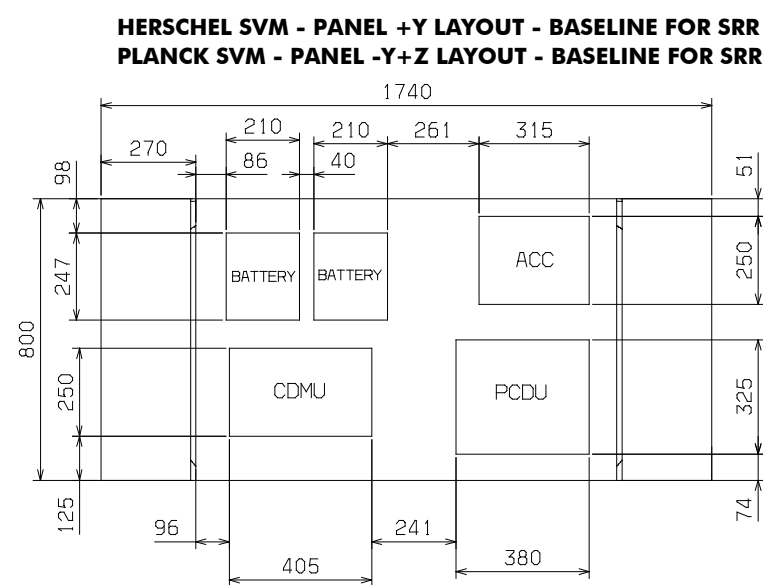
PLANCK SVM GENERAL LAYOUT
